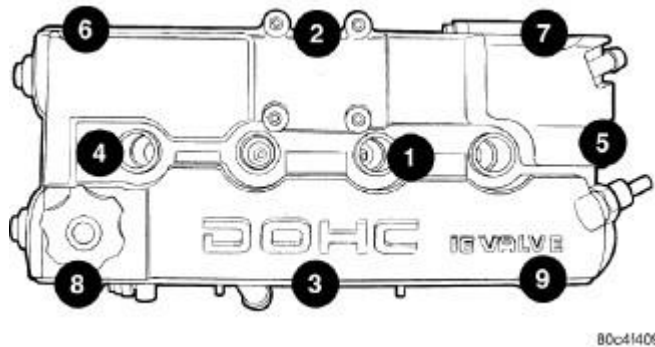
Cylinder Head Cover Tightening Sequence (Typical Cover Shown)
